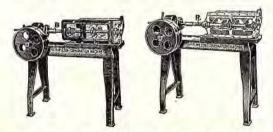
(left). The combination machine boring out the babbitted main bearings, with caps in position and boring fixture attached to cylinder block. Fig. 21 (right). Aligneaming the main bearings with caps in position after having bored them.
